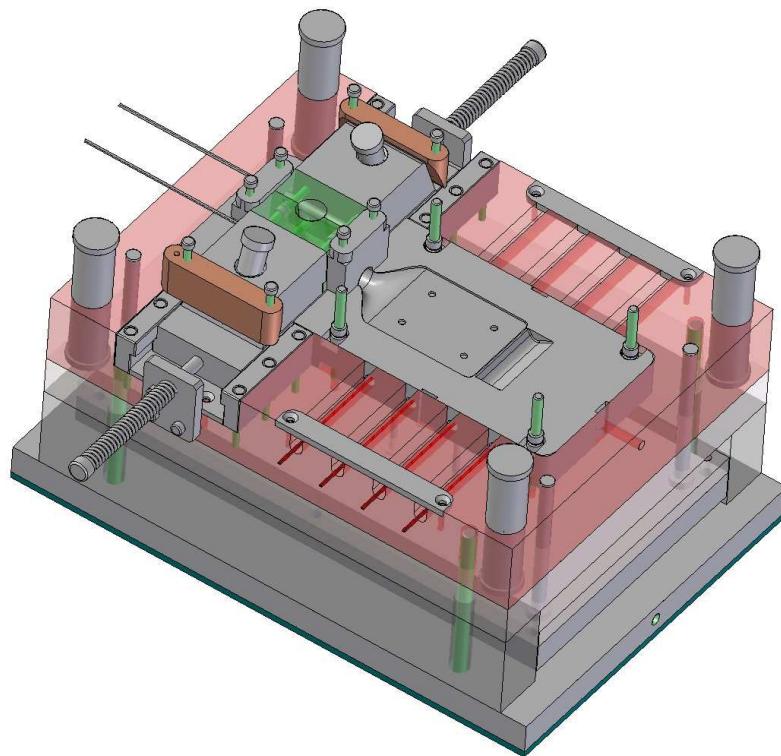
Moving half of the plate die (containing the $4 \times 80 \times 100 \text{mm}^3$ cavity insert) used with the 50 t Edgewick HPDC machine.
